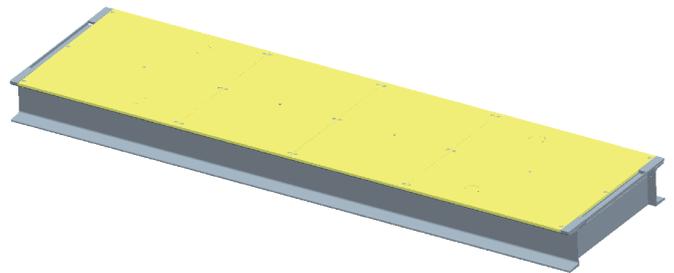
Axle scale – External dimensions (LxWxH) = 2900x800x250 mm, weight = 620 kg
